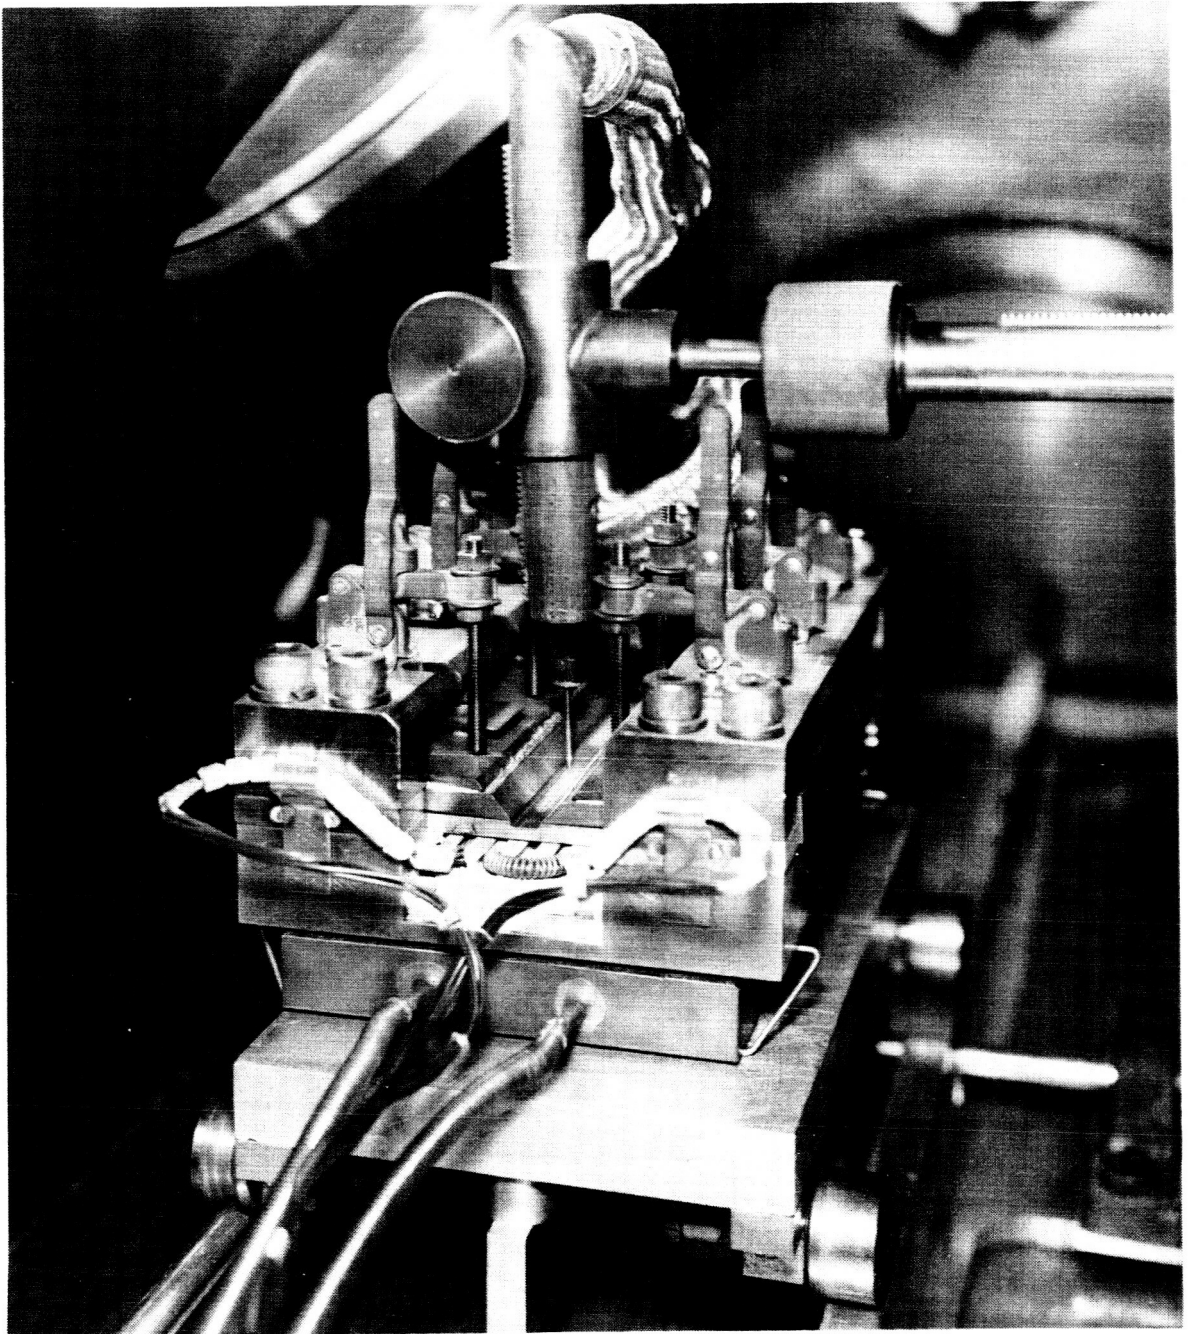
Sheet Welding Fixture Used for Welding Tungsten-Base Alloys with Preheat to 1400°F
